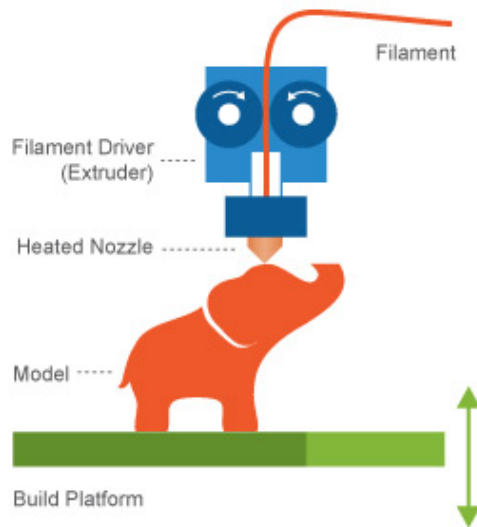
The mechanism behind FDM technique. A thermoplastic material is extruded through a nozzle, layer by layer, creating the model over the build platform [48].
